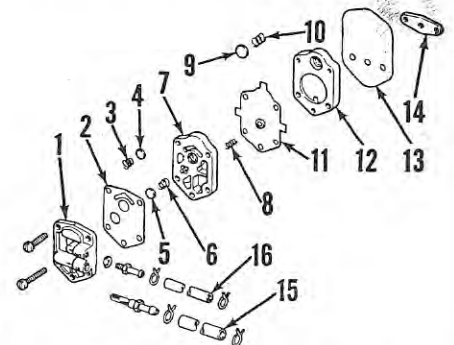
Exploded view of diaphragm type fuel pump used on most models.
